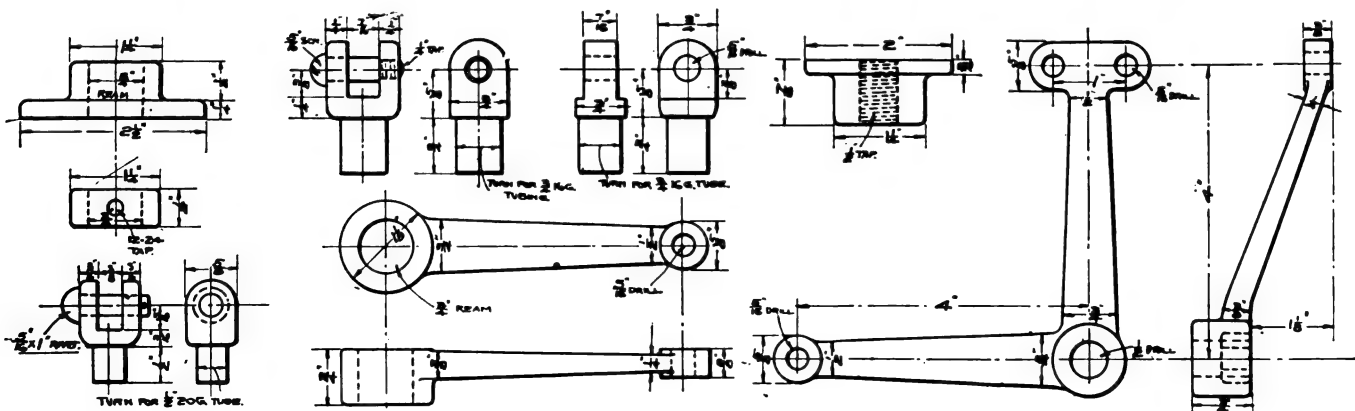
DETAILS OF STEERING GEAR CONNECTIONS.
